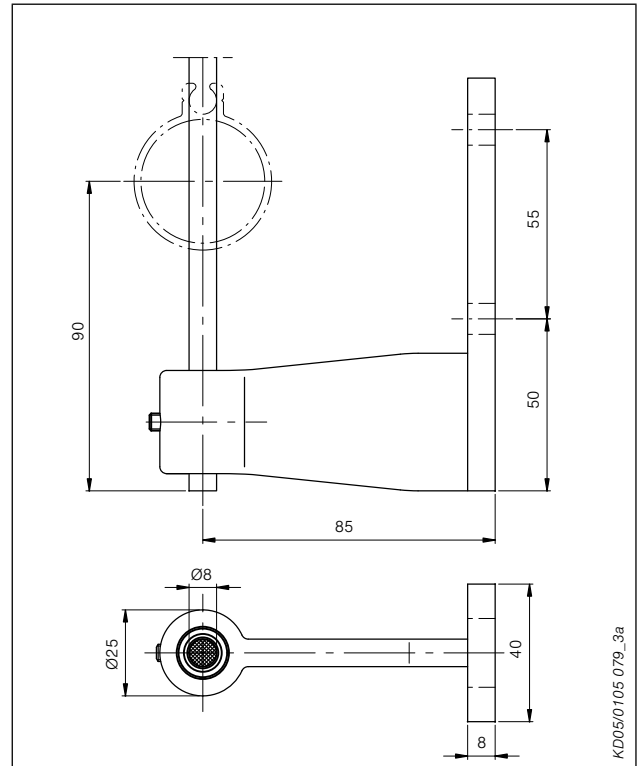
Rod bracket for individual unit, guide rod Ø 8 mm
